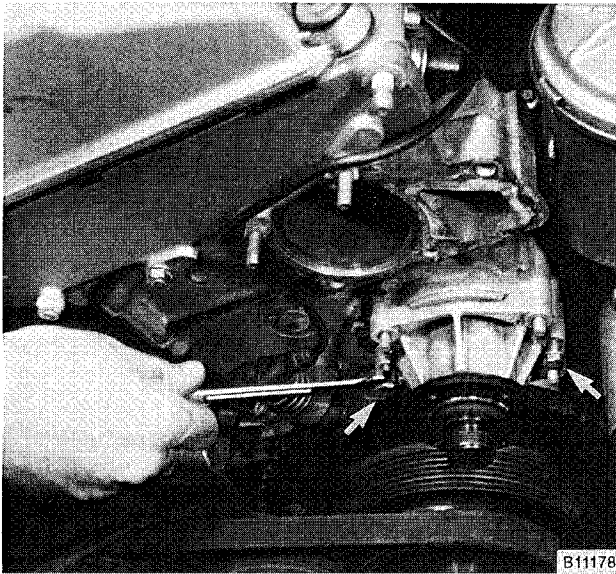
Coolant pump being removed. Thread two M6 bolts (arrows) in evenly to withdraw pump. (Thermostat and hoses have been removed for visual access.)
